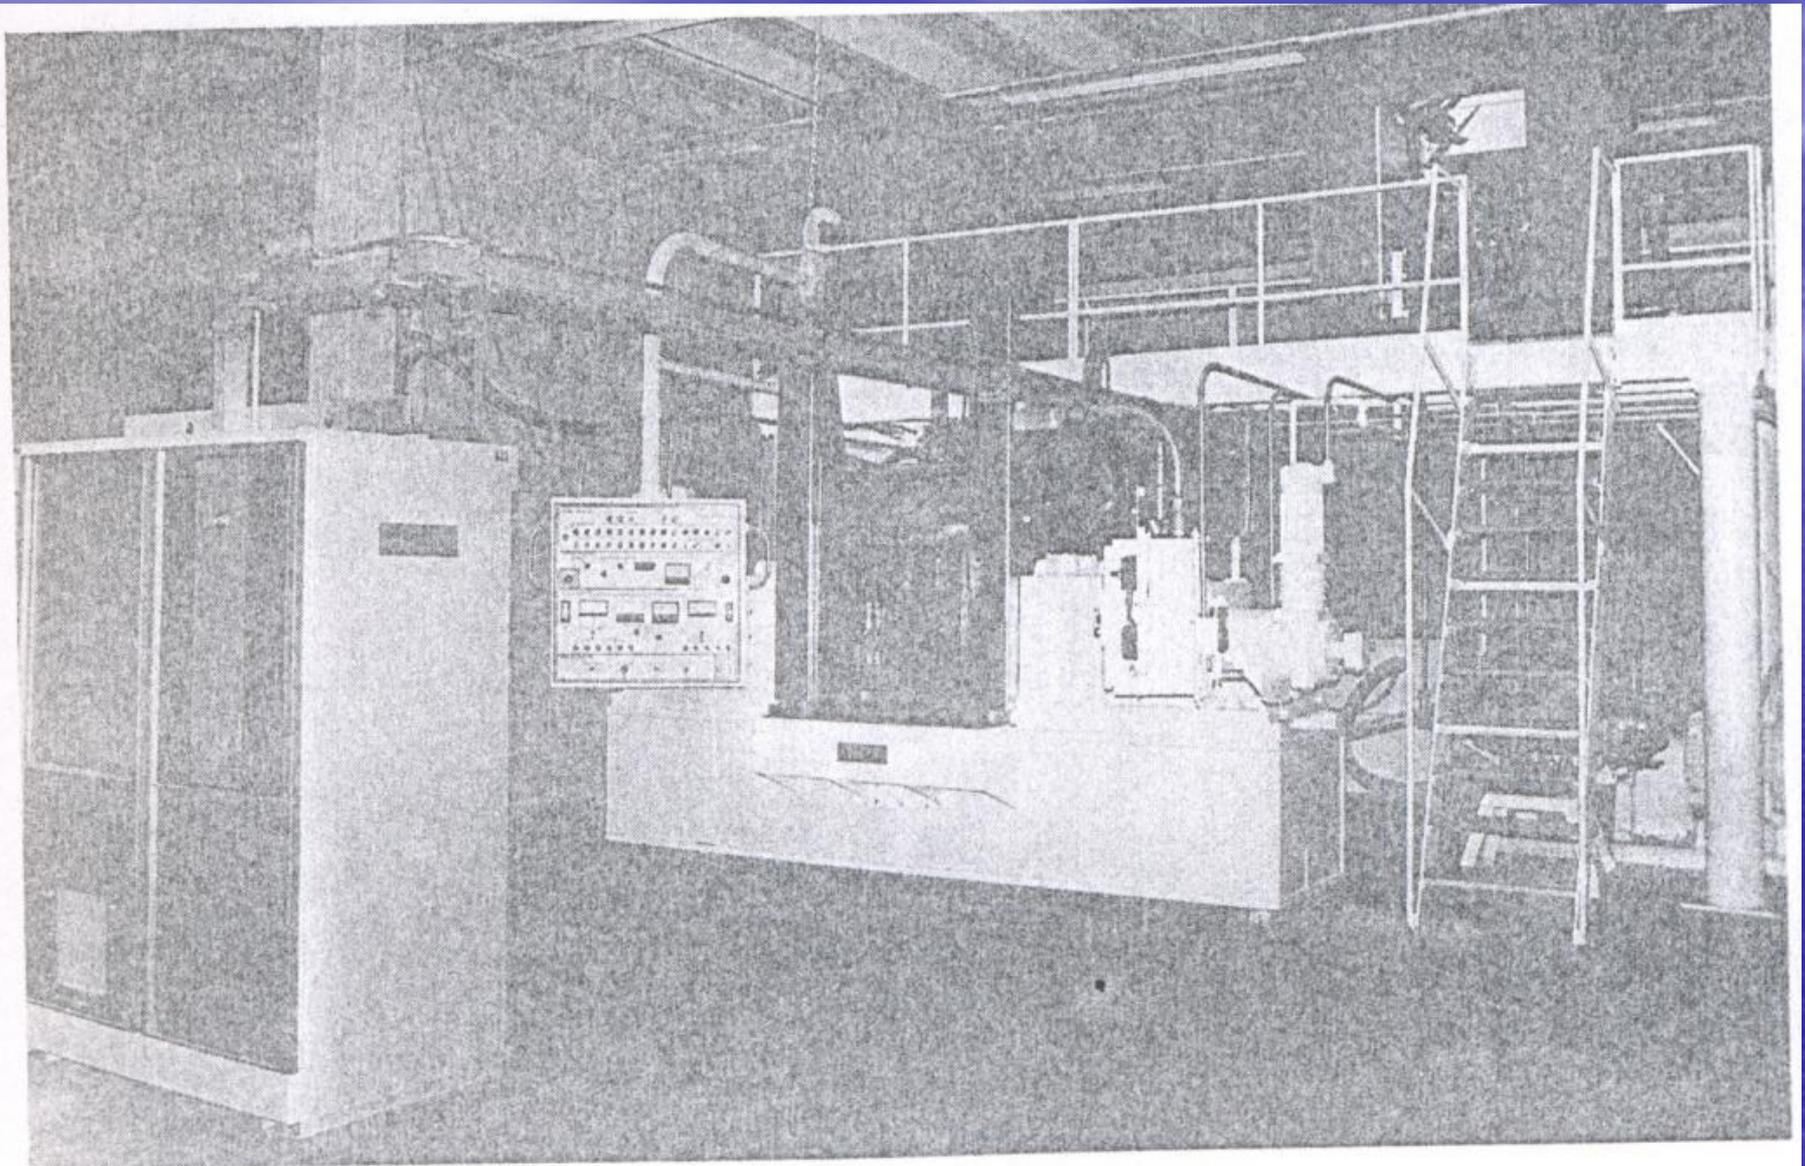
A CNC tri-ram ECM system used for machining turbine engine blades (*Source:* courtesy, Chemform, Pompano Beach, Fla).
